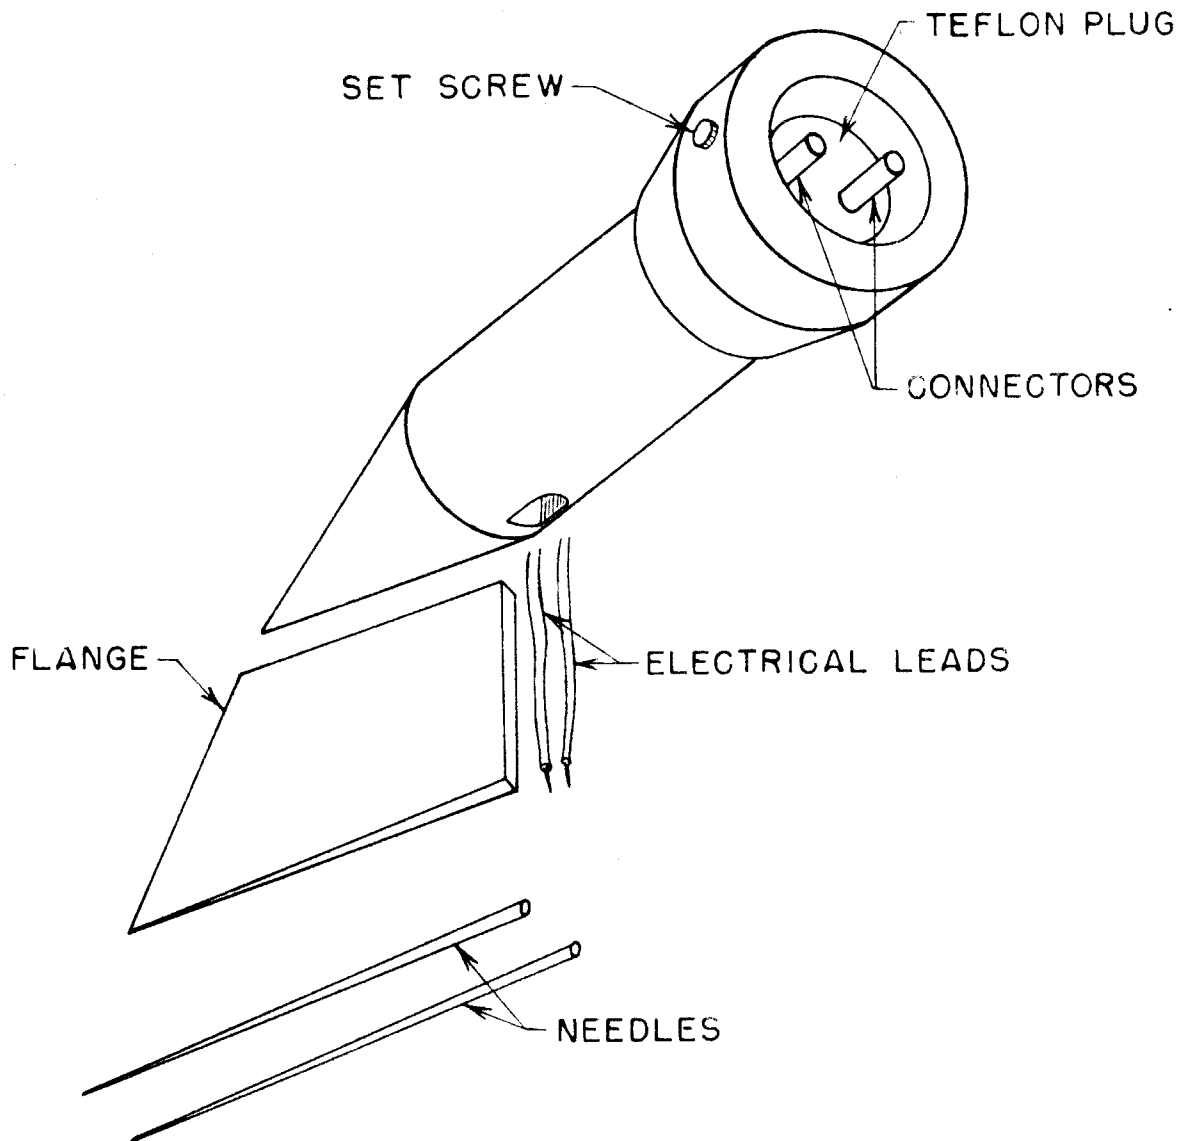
EXPLODED SCHEMATIC VIEW OF THE HOT-WIRE ANEMOMETER PROBE HEAD
